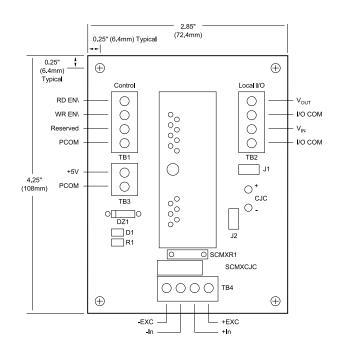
SCMXEV Evaluation Board Dimensions and Pin Layout
